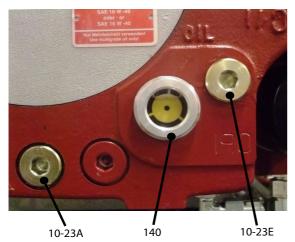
Oil level check at the inspection glass/Oil Filling Screw
